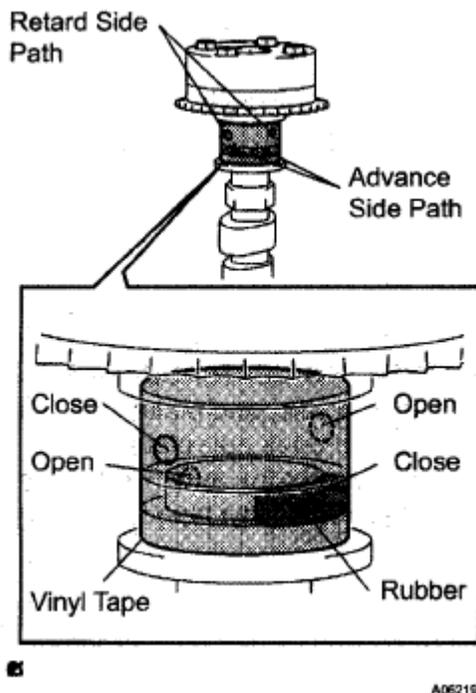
Covering 4 Oil Paths Of Cam Journal With Vinyl Tape
